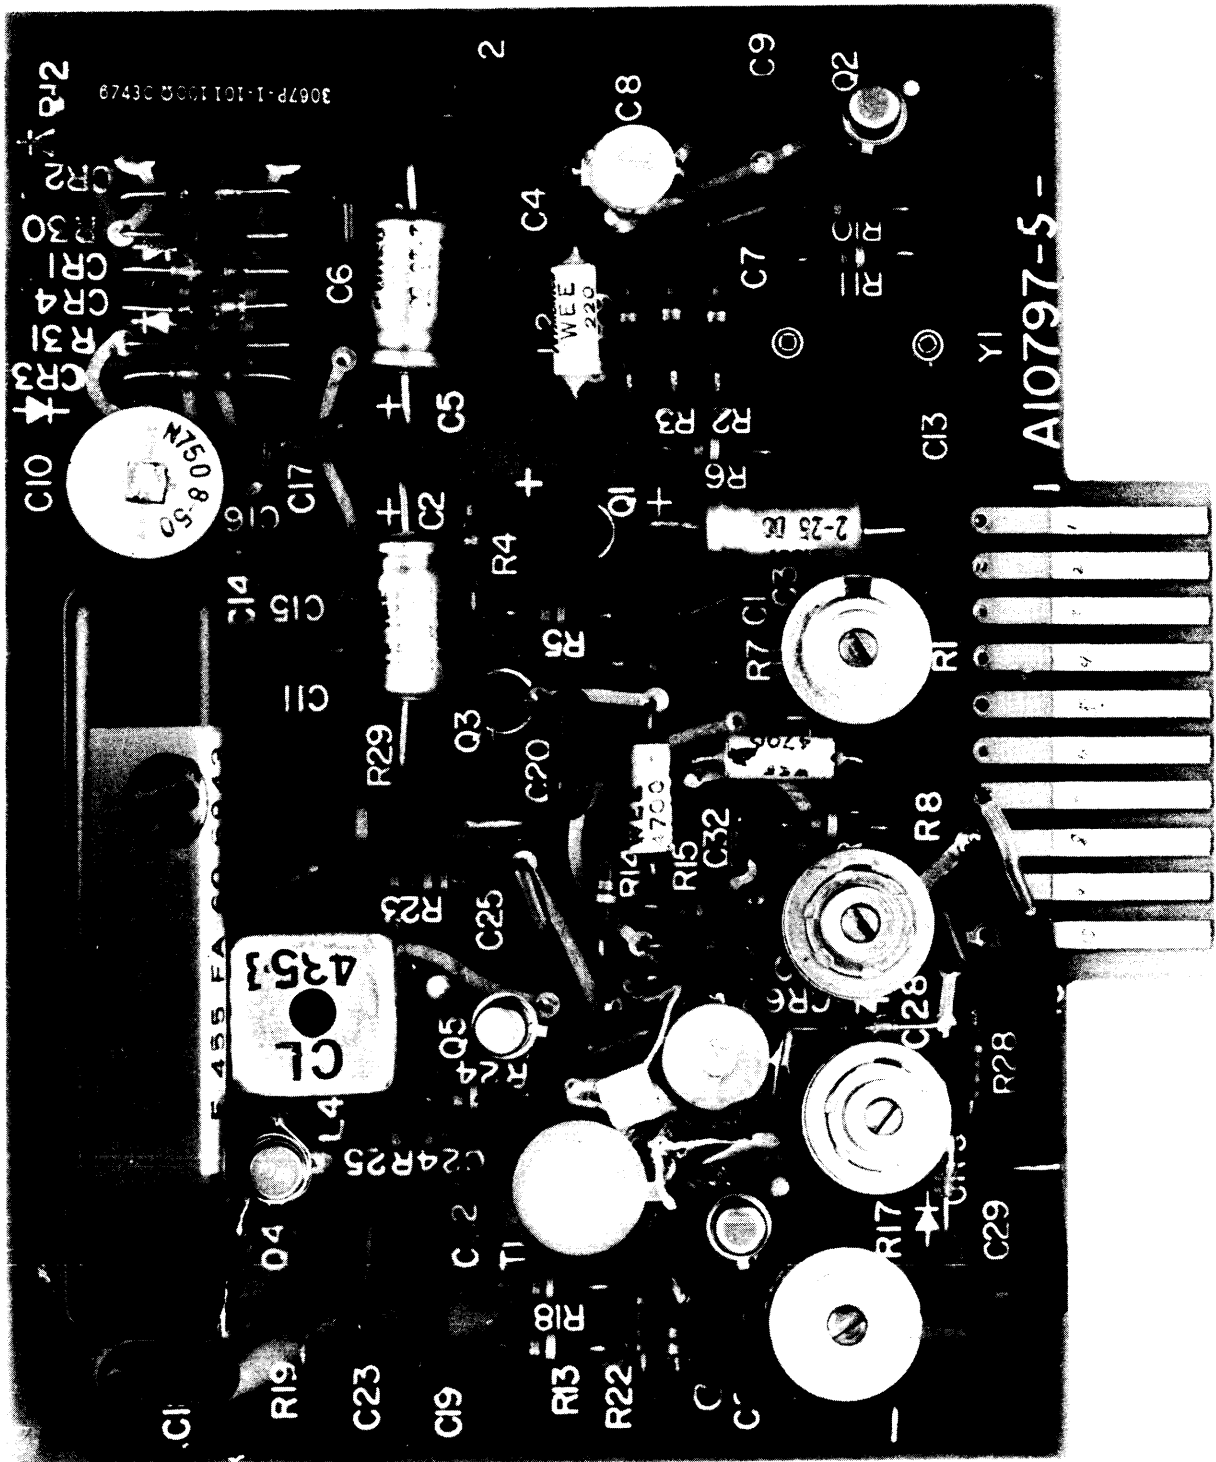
TRANSMIT IF ASSEMBLY, AI0797, MTR-100A
